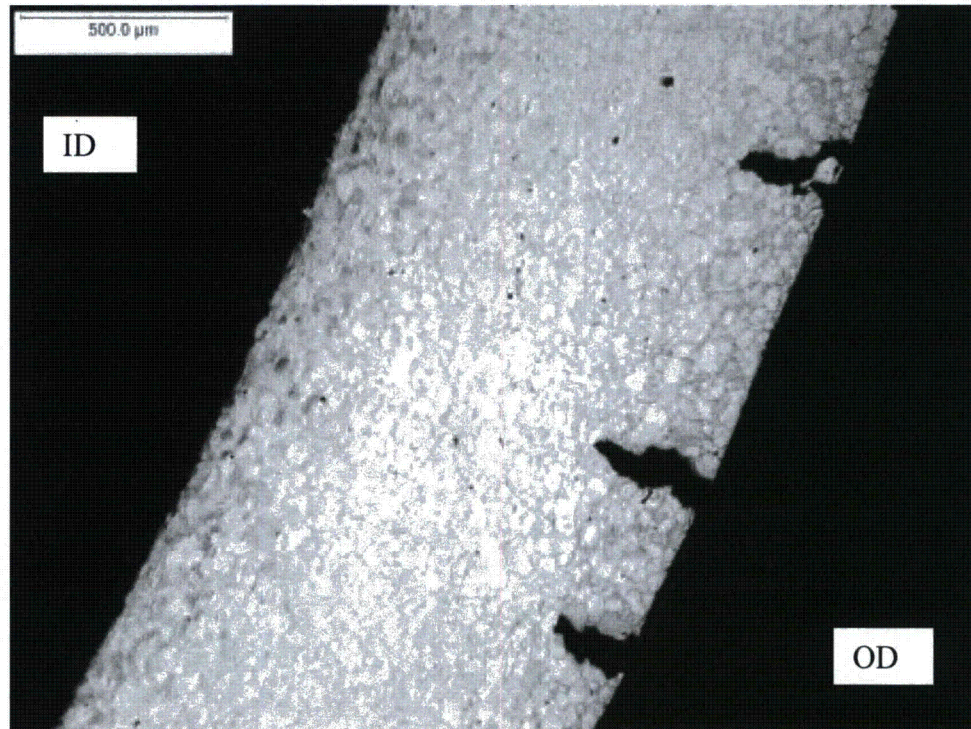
R24C41 04H, Transverse Section: Cracks at 40°
